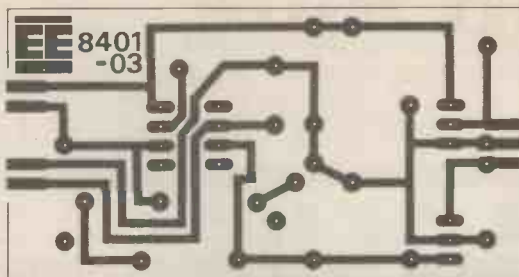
The master p.c.b. pattern (actual size) for the Analogue Thermometer Unit. This board is available from the *EE PCB Service*, Order Code 8401-03.
